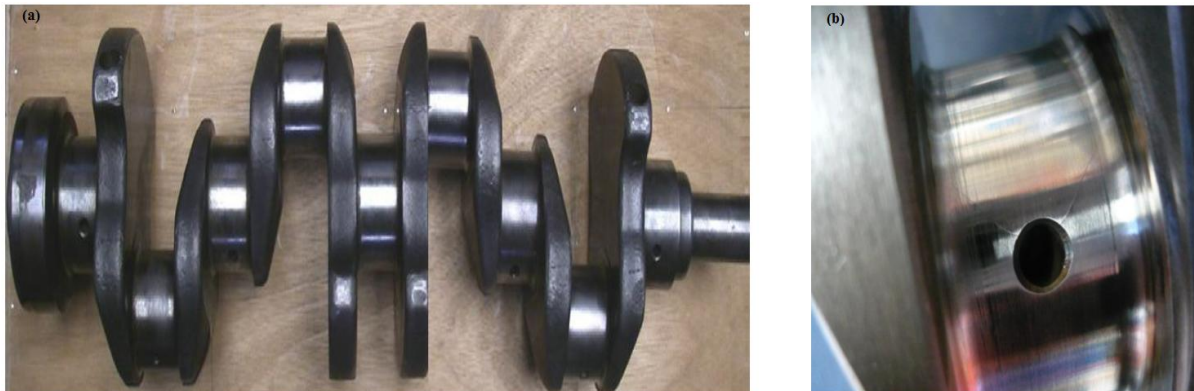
(a)crankshaft, (b) cracked portion
